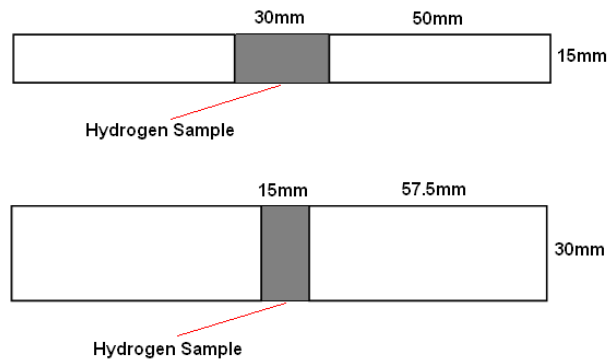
Rotation of the test assembly was required (bottom image) to accommodate the broader weld deposit produced by the 1.6mm FCAW consumable. The hydrogen sample was analysed for a 15mm long weld deposit, as opposed to a 30mm weld deposit typically used for narrower welds.
